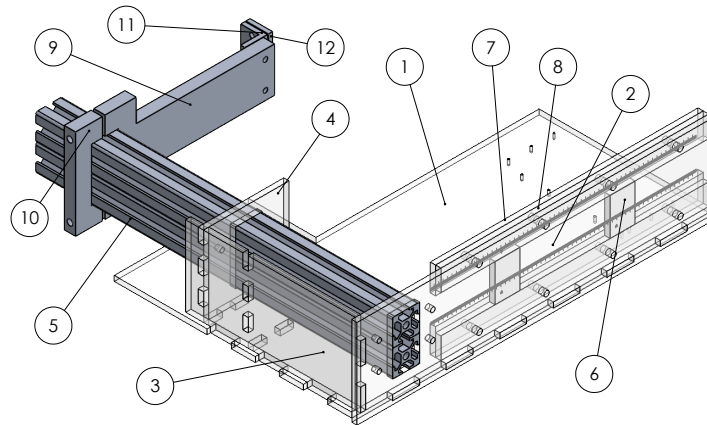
CAD assembly of the designed parts of the experimental prototype.
